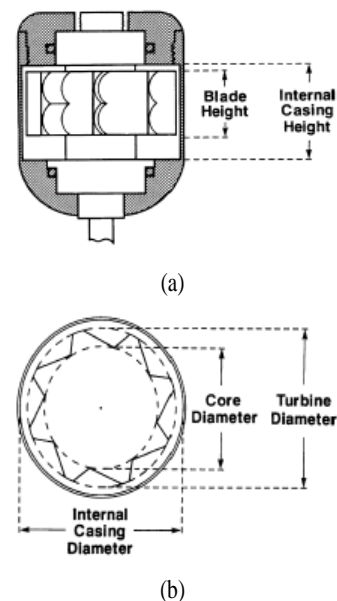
Cross section of handpiece head : (a) perpendicular plane, (b) horizontal plan
